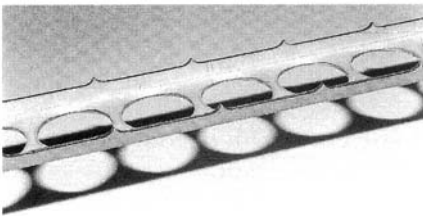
Cross-rod for the support of double sided wet coated sheet metal segments
